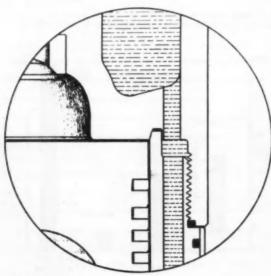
Head and linear design incorporates wedge liner seal and cooling arrangement.
